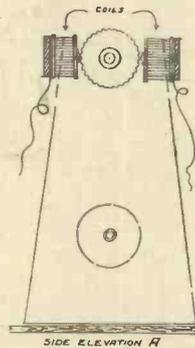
This drawing shows an alternative and simpler method of fitting the gear directly.
